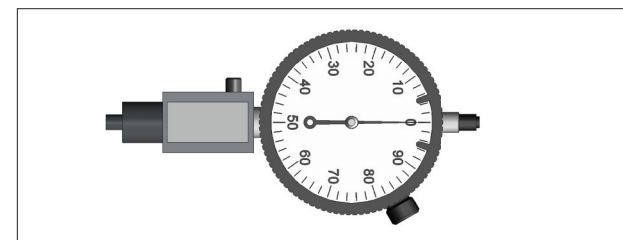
Figure F. Inspection Depth Gauge, Part # 910 121 179.
